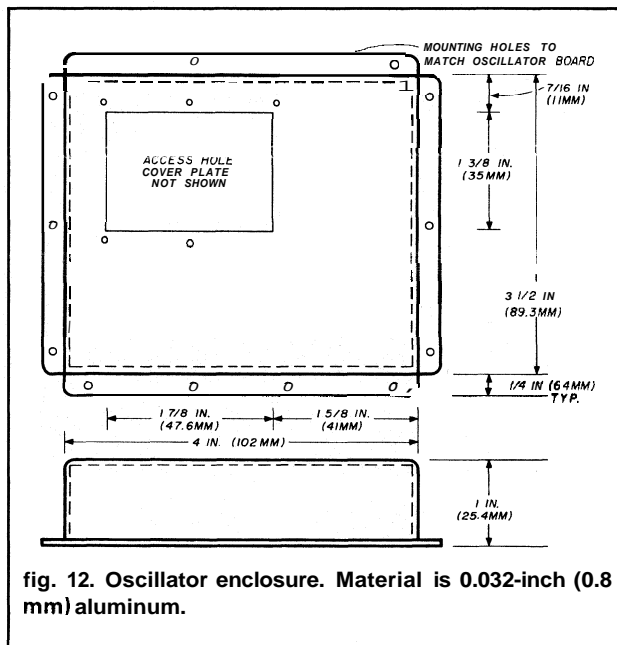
Oscillator enclosure. Material is 0.032-inch (0.8 mm) aluminum.
